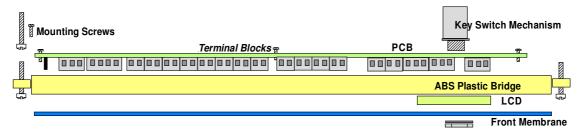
Exploded Top View of Membrane, Bridge and PCB
